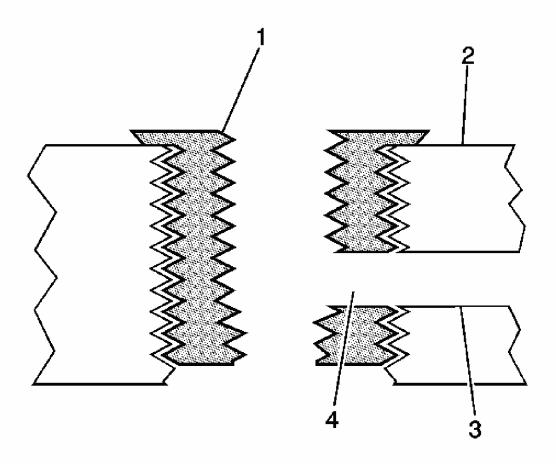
View Of Restricted Engine Coolant Passages - Tapered Pipe Thread Repair
